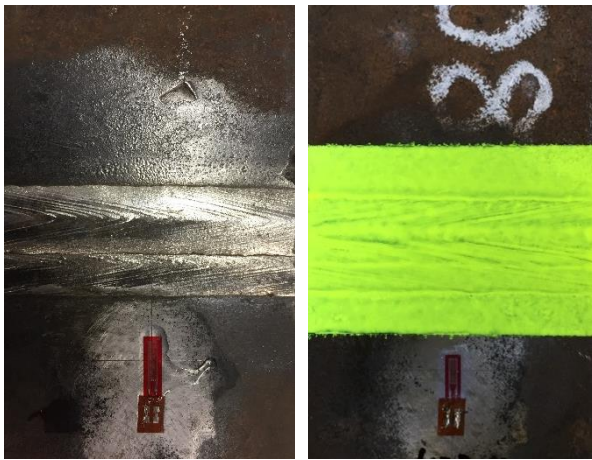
Butt weld without and with fluorescing coating.
